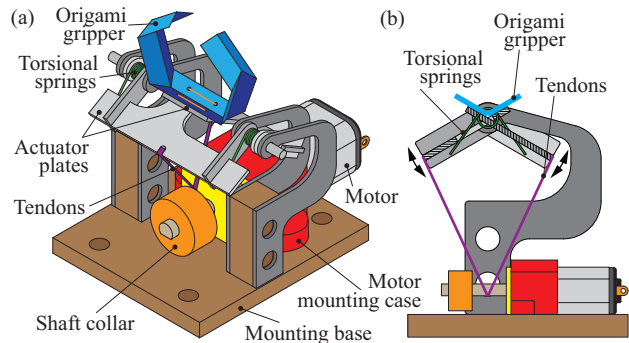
(a) The actuator assembly folds the origami string at the base segment. (b) A cross-section view of the scissor design.
